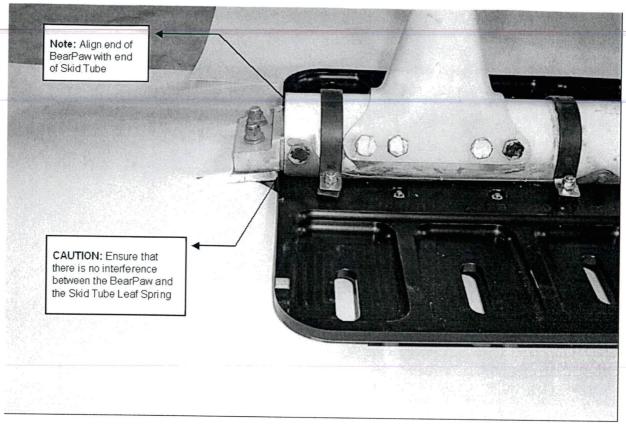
BearPaw Model BP350 (P/N 112-0002-00 or P/N 112-0002-00-S) - Alignment on Skid
